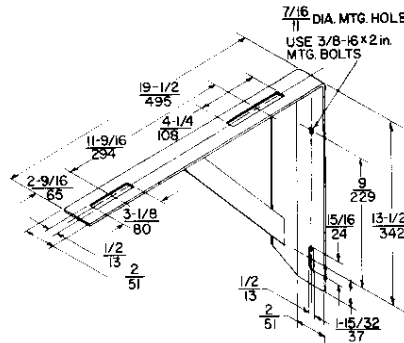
A-4000-108 Wall Bracket (1/8 in. Plate Metal)
